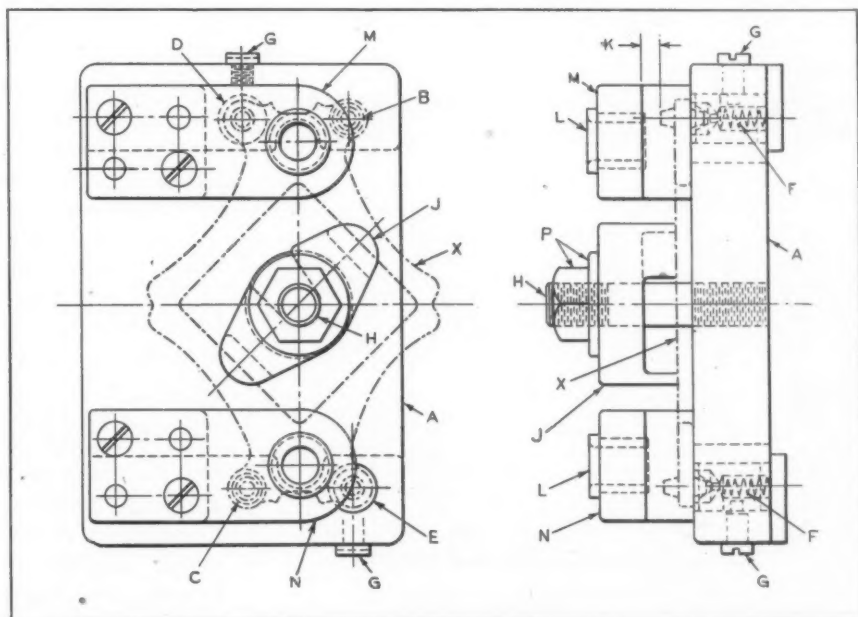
Jig for Preliminary Drilling Operations on Group Forging
